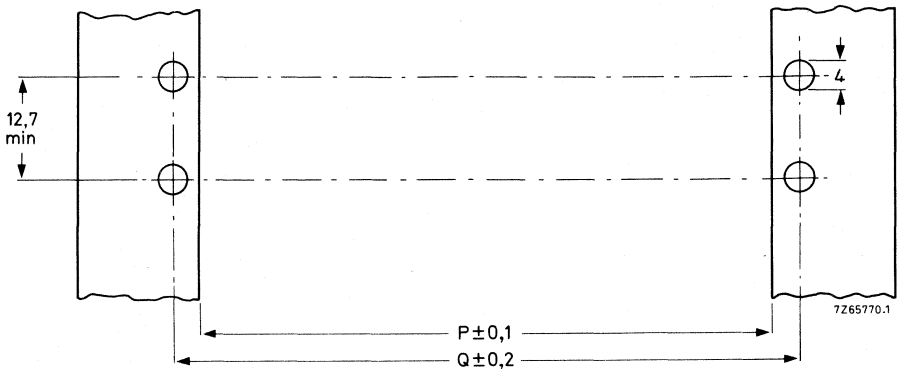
Piercing diagram for rail mounting; see Table 3 for dimensions P and Q.
